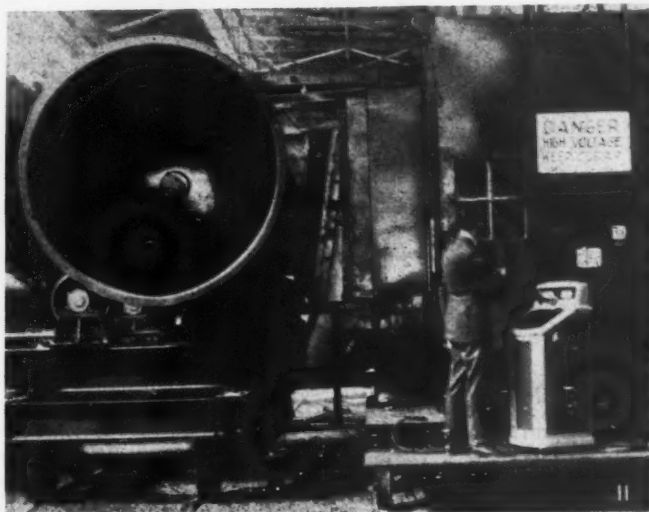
Installation of X-ray equipment for inspection of welded seams in pressure vessels.
